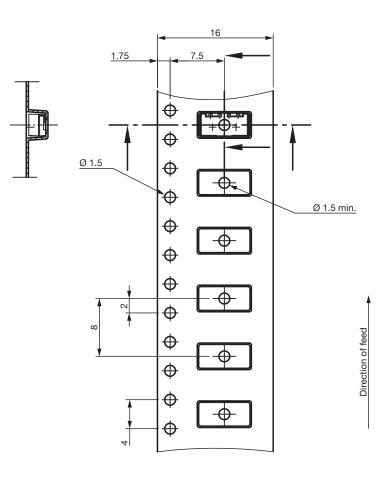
Issue: 4; 12.06.13
